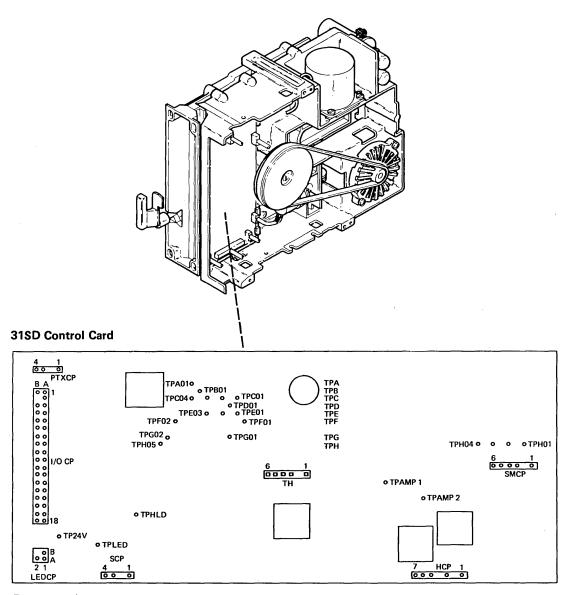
(Part 3 of 4). Diskette Drive Parts
